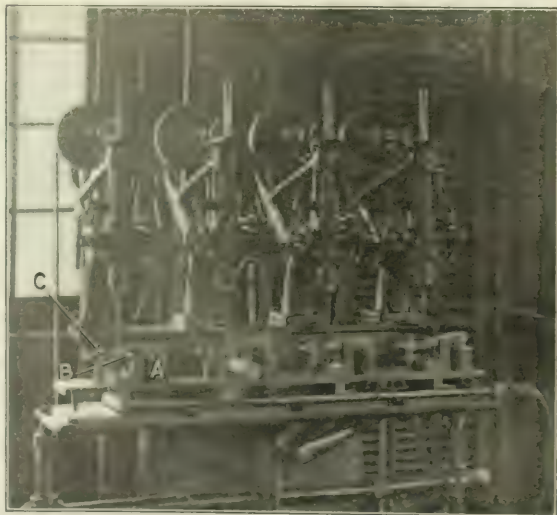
Pneumatic Clamps and Jigs for Boring Holes in Pins.
